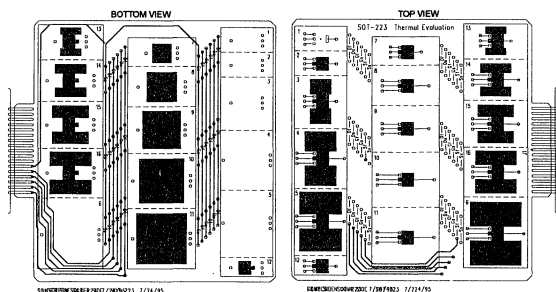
Both Sides of the 4.5"x5" SOT-223 Thermal Board. Complete scale drawings is shown in section 5.
